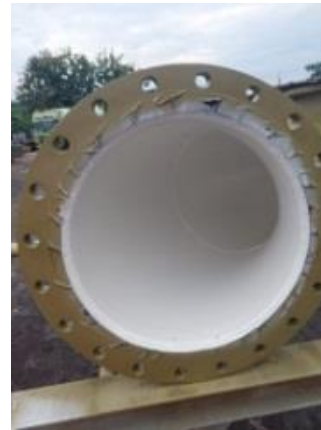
Coating/coating of A106 GR.B Carbon Steel Pipe (in the form of U Tube Seal Deck)
